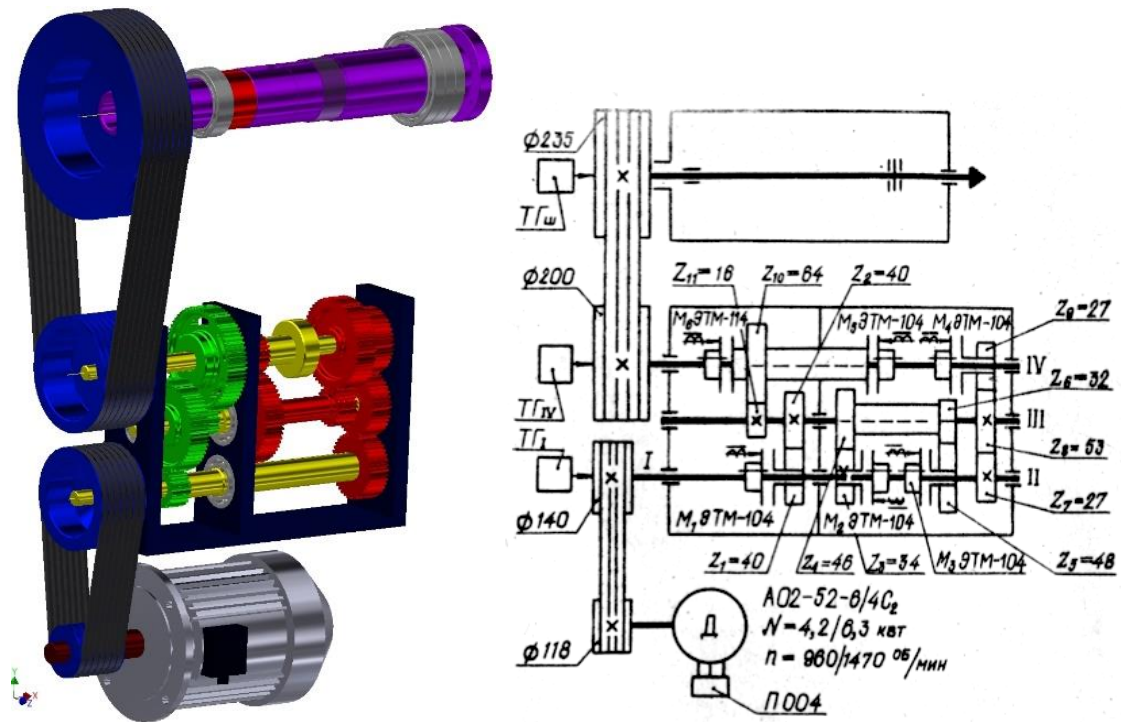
Solid model and kinematic scheme of spindle drive with automatic gearbox
